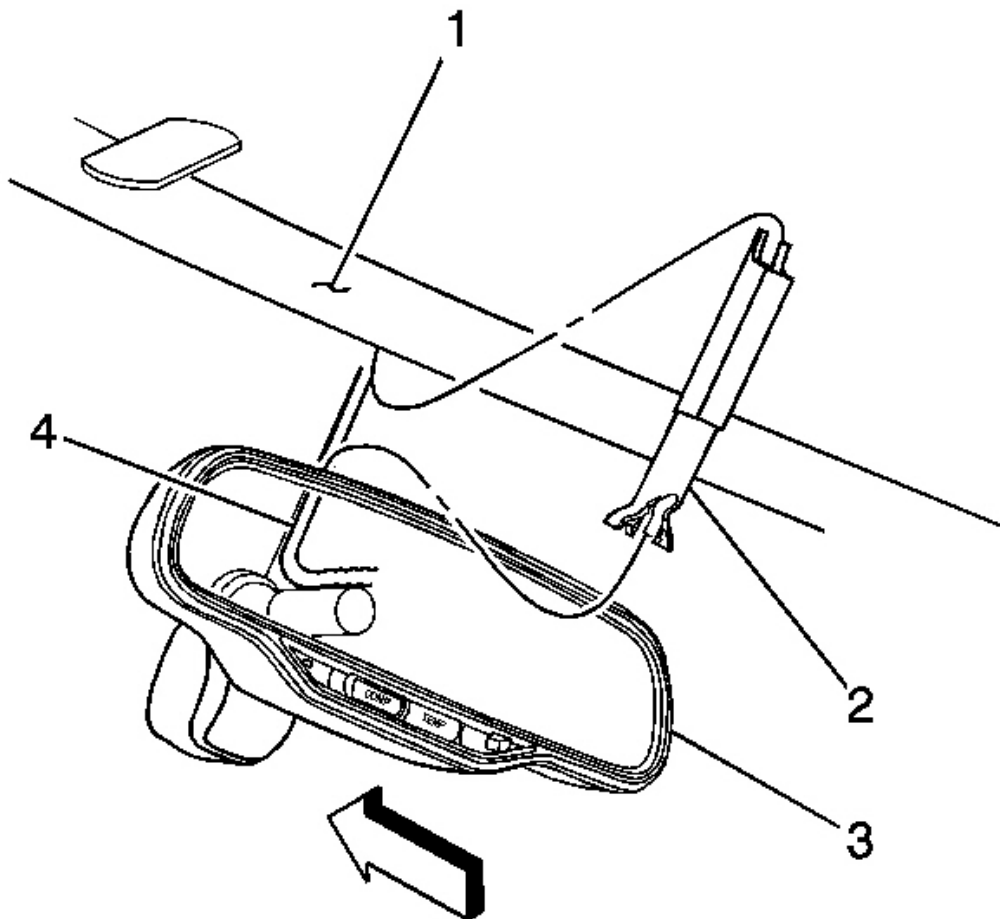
Identifying Electrical Connector & Rearview Mirror
